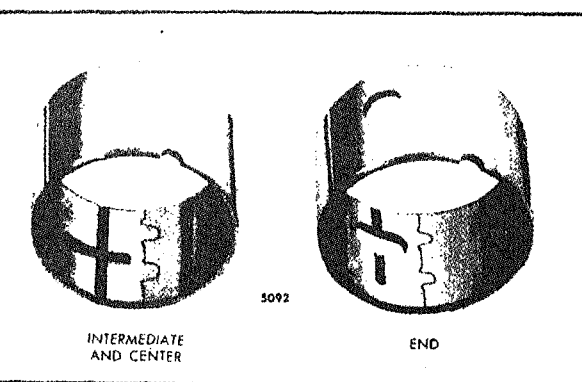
Camshaft and Balance Shaft Bearing Identification
